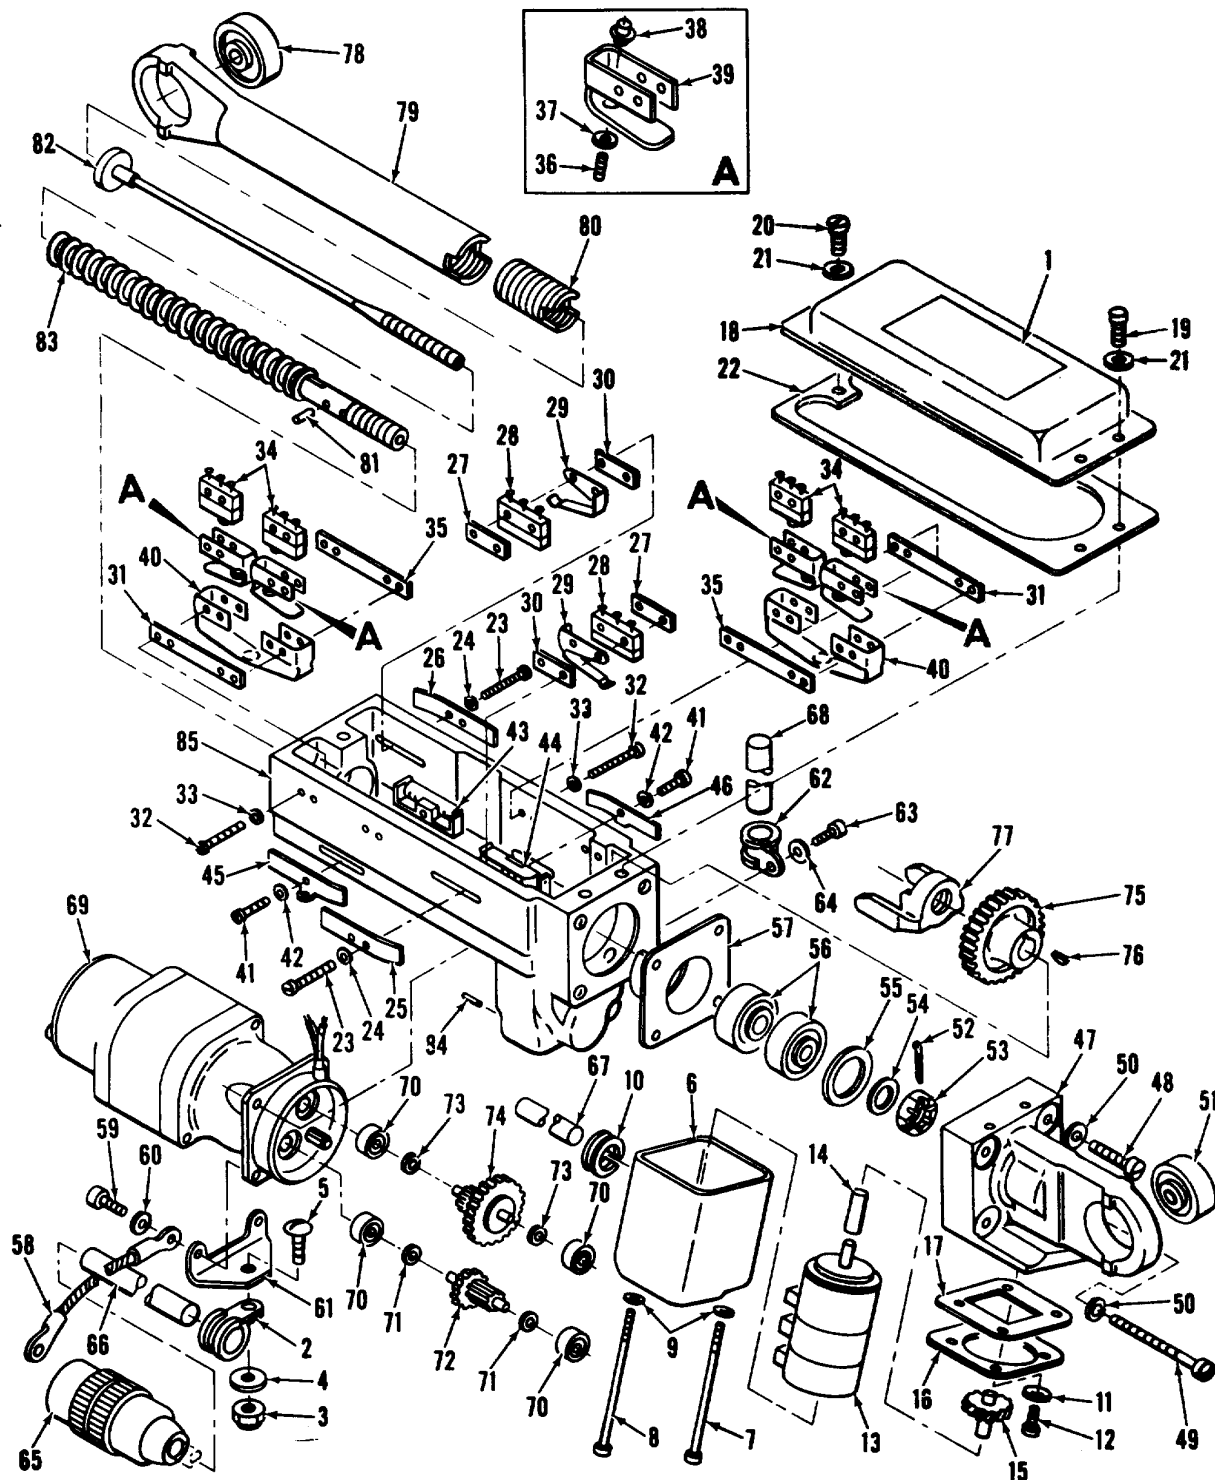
Electromechanical Linear Actuator, 541928-1-1 Exploded View (Sheet 1 of 3)
